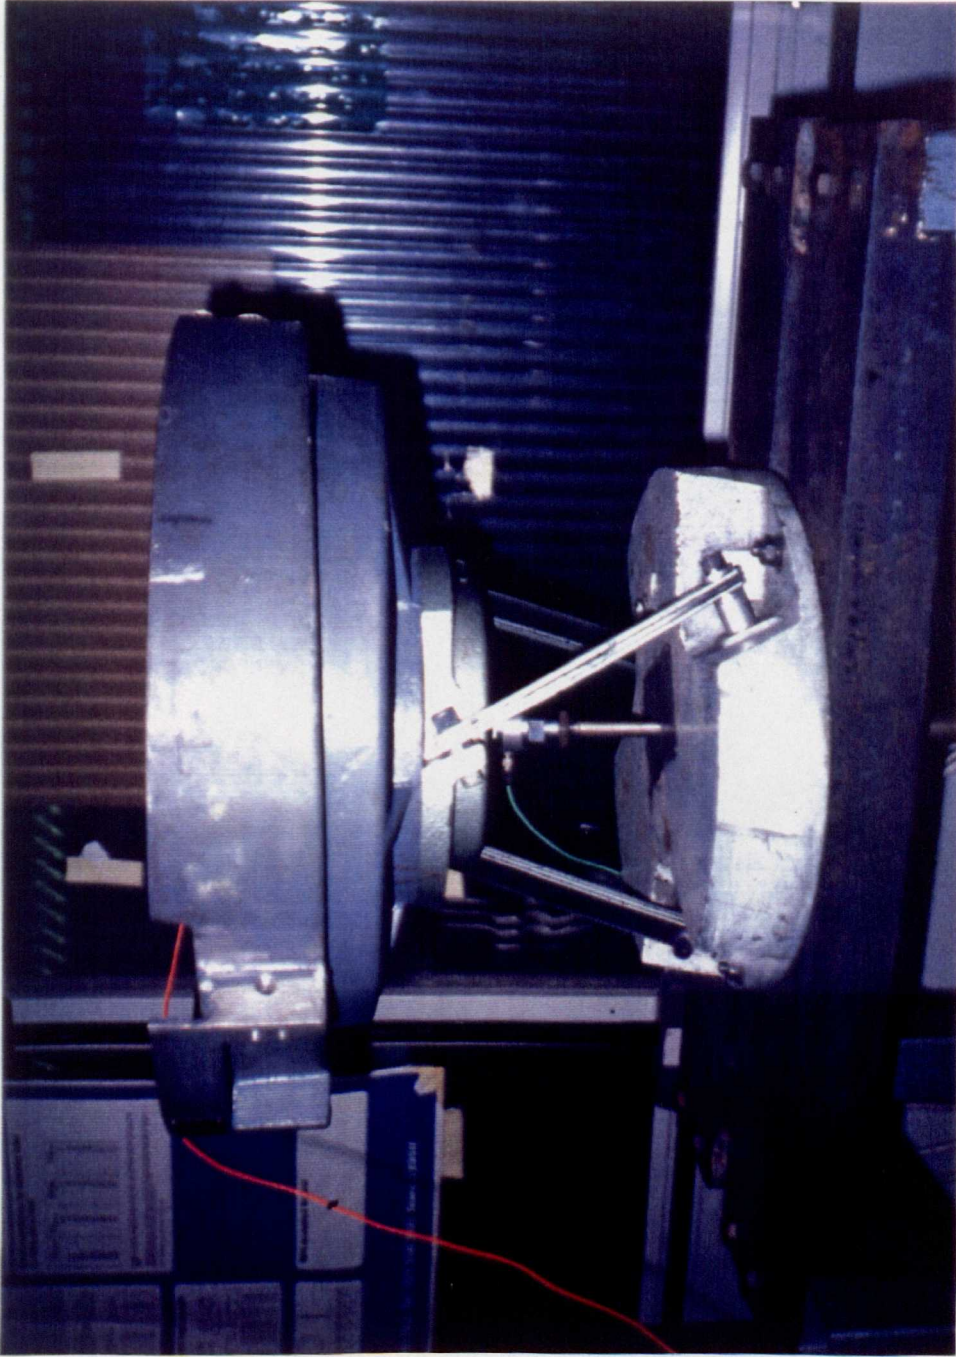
Photograph of bowl feeder showing tubular spacers inserted to vary the spring angle
